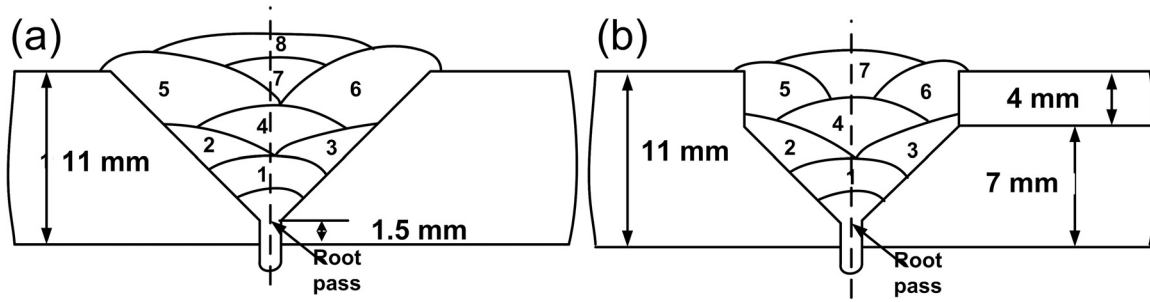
Schematic of weld passes: (a) V-groove, (b) narrow-groove.
